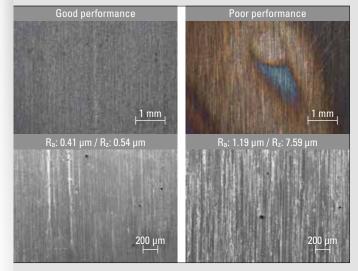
The corrosion resistance of stainless steels is significantly determined by the machining condition. The finer the surface finish, the higher the corrosion resistance. Example: Two SiC deep grinded surfaces (Material AISI 316L, 1.4404) before surface hardening with good (left, fine grinding mesh) and poor (right, coarse grinding mesh) performance after corrosion testing in 0.5 m NaCl solution.
